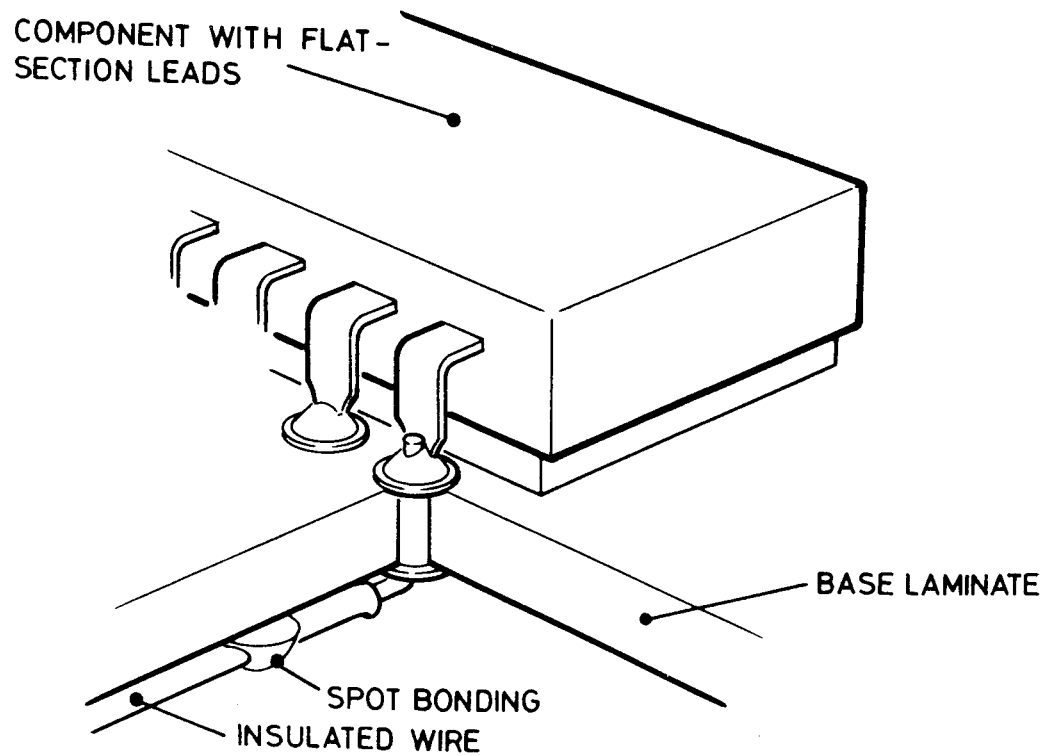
Mounting a connector with a wire link soldered onto a cropped lead
